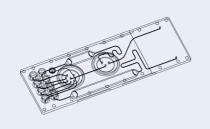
Schematic drawing of large sensor integration area platform II - Fluidic 1012
